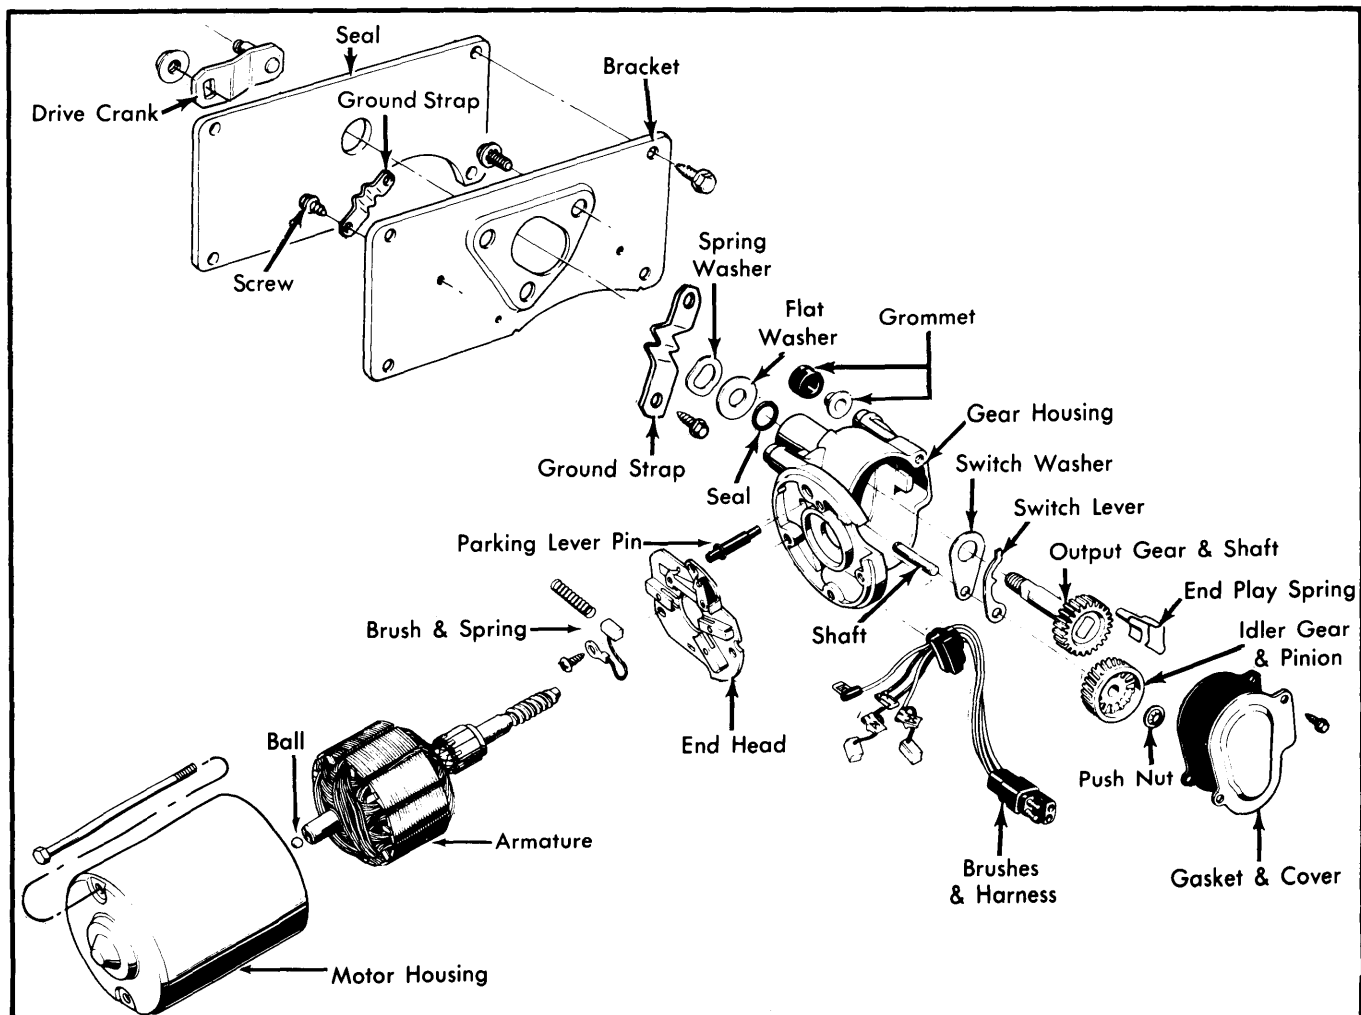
Exploded View of AMC Wiper Motor & Transmission
